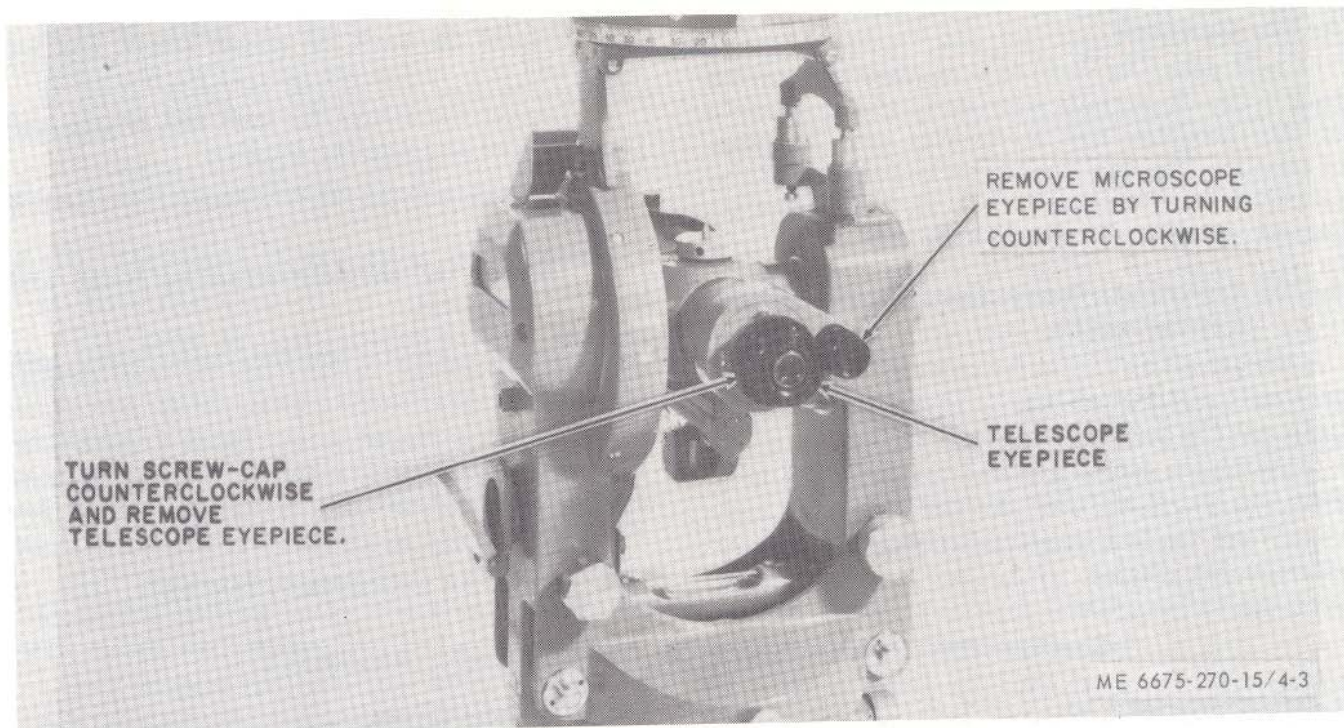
Telescope and microscope eyepieces, removal and installation.
